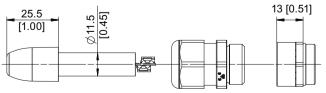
Dimension drawing SITRANS AW050 Bluetooth adapter, dimensions in mm (inch)
